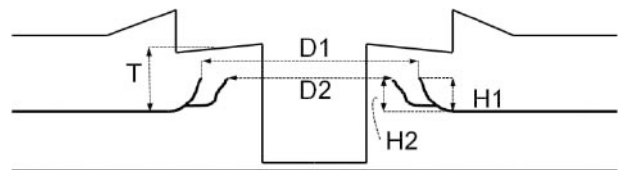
Schematic of key geometrical features of FSSW coupon with dimension nomenclature. (Refer to Table II for dimensions)
